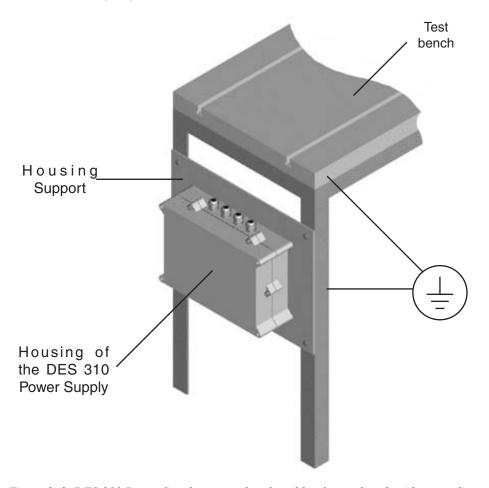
DES 310 Power Supply mounted to the table of a test bench without cooling
